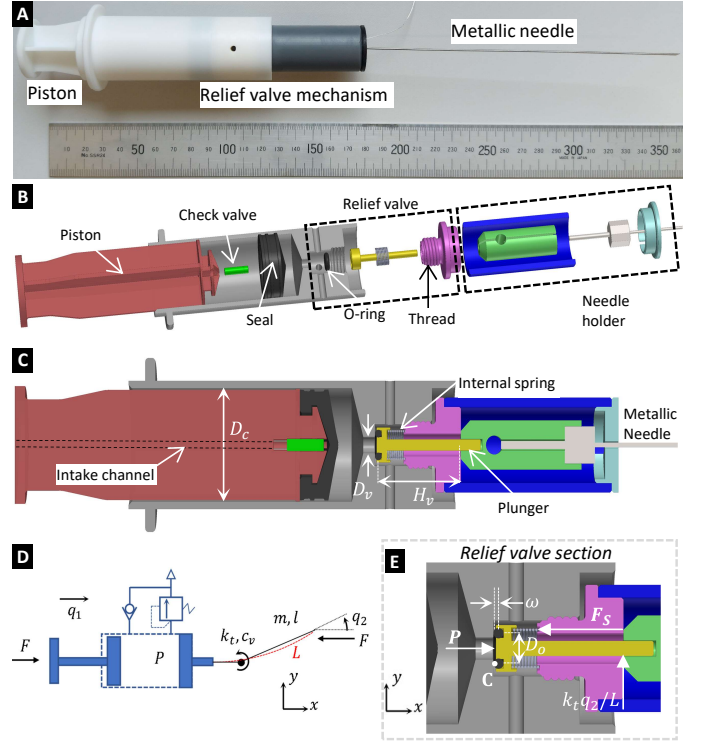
Photo of the prototype (A), exploded view (B) and section view of the CAD model (C), schematic (D), and detail view of the relief valve (E).
